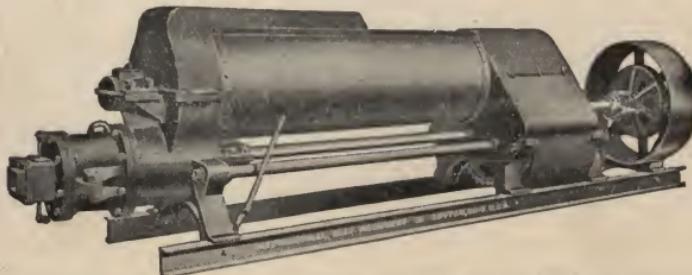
,799.—International stiff mud machine. *It consists of* a combined pug mill and brick machine. The upper part of the machine is a long tub with blades which mixes and tempers the material. The lower part has an auger which forces the tempered material through the die and discharges a solid bar of clay to be wire cut in making wire cut brick. This machine is also used in the manufacture of hollow tile, drain pipes, etc.
